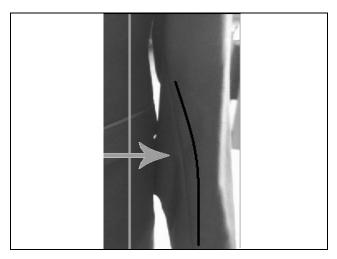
Turning Outwards Problem of Inner Sleeve Clamping Stitch
